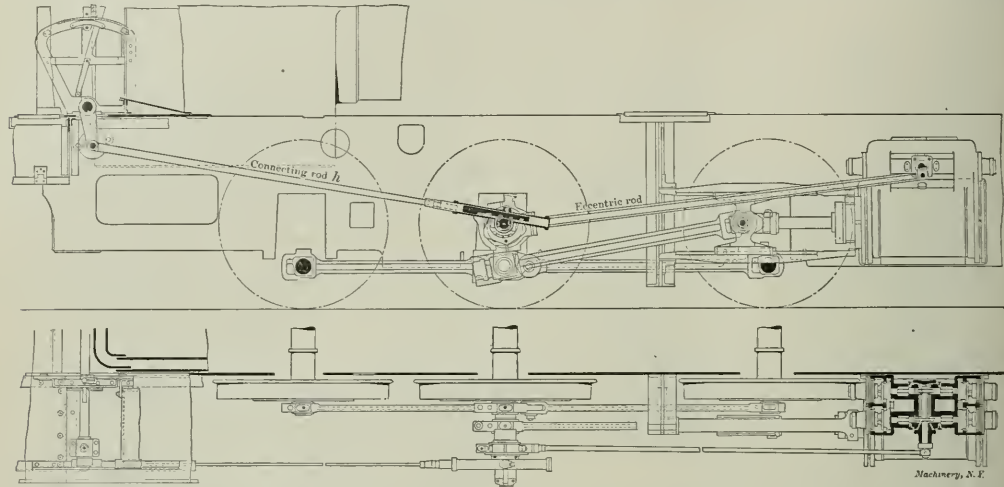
General Arrangement of the Lentz Reversing Mechanism.
